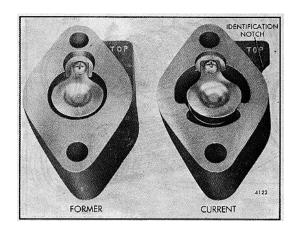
Oil Cooler Bypass Valve Assemblies
